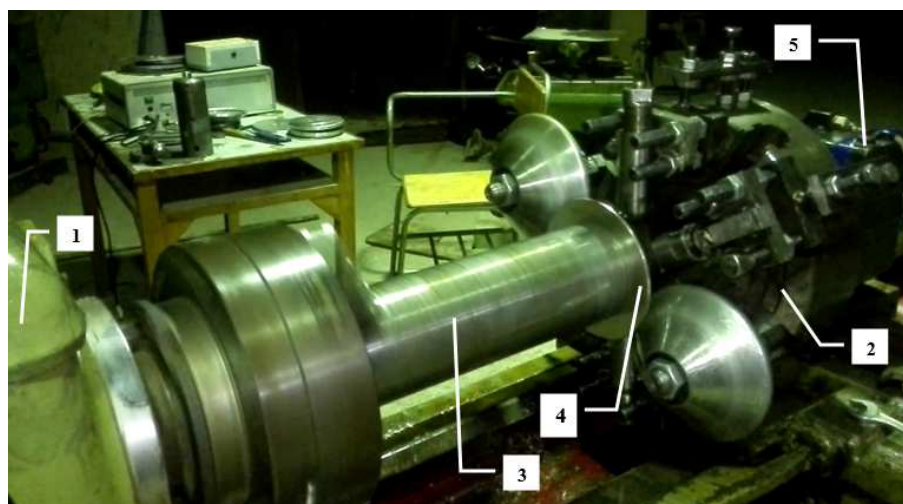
Experimental set-up of the Combined Process. (1) Center Lathe Machine (2) Combined New Tool (3) Mandrel (4) Aluminum Blank (5) Load Measurement Device.
